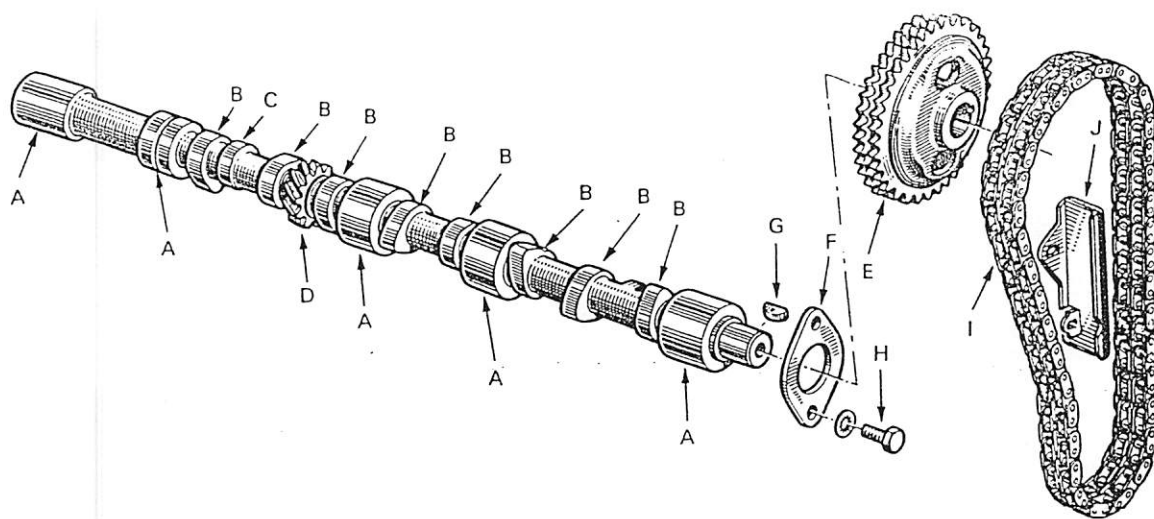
Typical camshaft. A—Main camshaft bearings. B—Cam lobes. C—Eccentric to drive fuel pump. D—Gear to drive distributor. E—Camshaft sprocket. F—Thrust washer. G—Key. H—Retaining capscrew. I—Timing chain. J—Rubbing block. (Renault)
